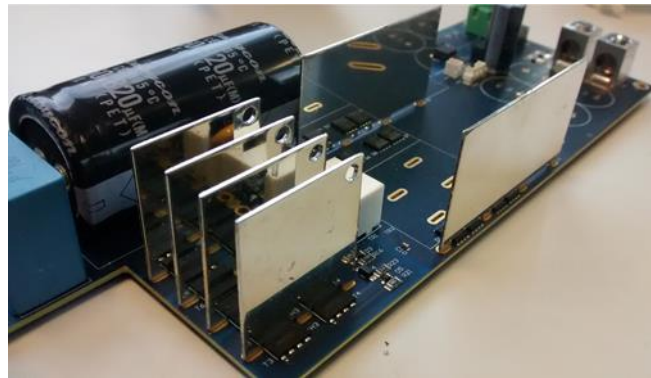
Heat sinks for HV bridge devices and LV secondary devices in a partially assembled PSFB 3300 W converter board.
